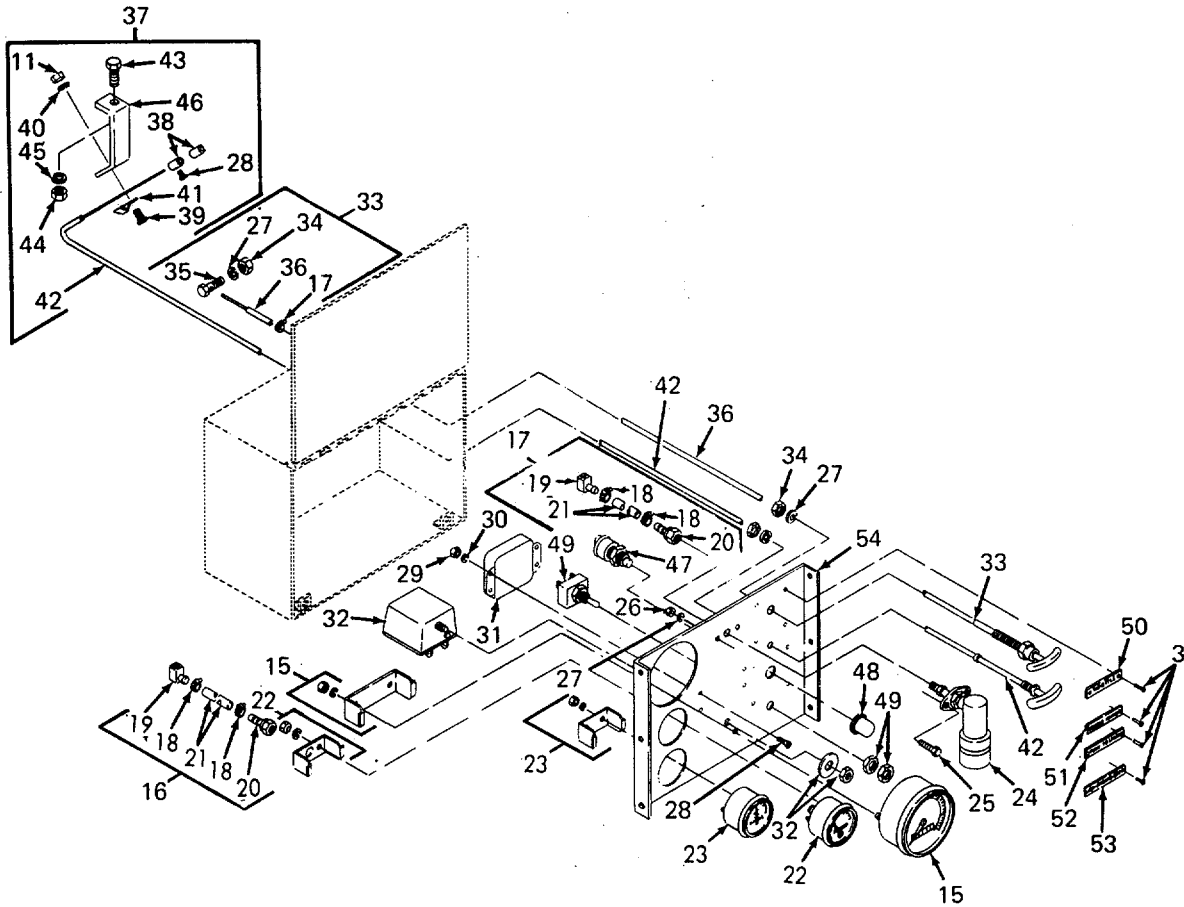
Control Panel Cover Assembly (Sheet 2 of 2)
